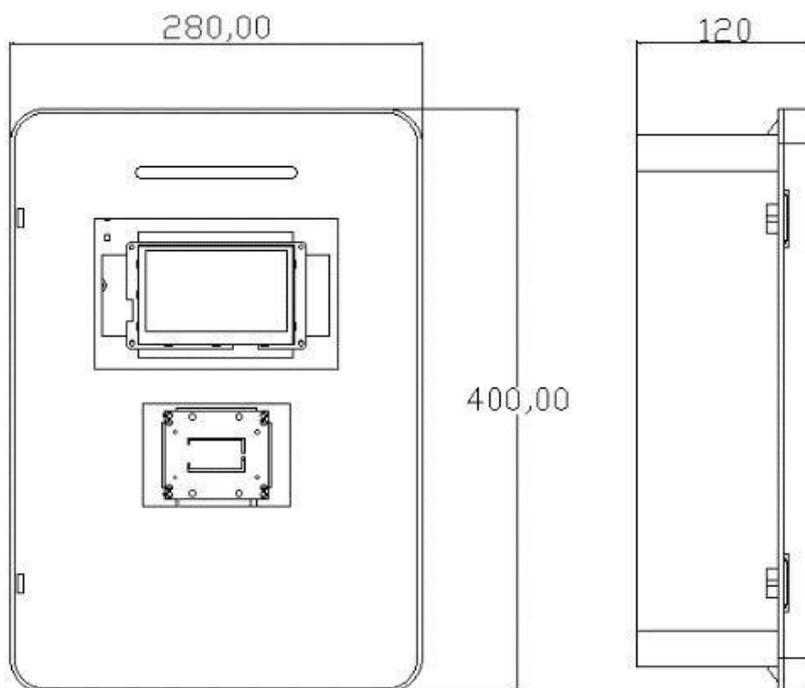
Dimensions of Wall-Mounting Equipment
